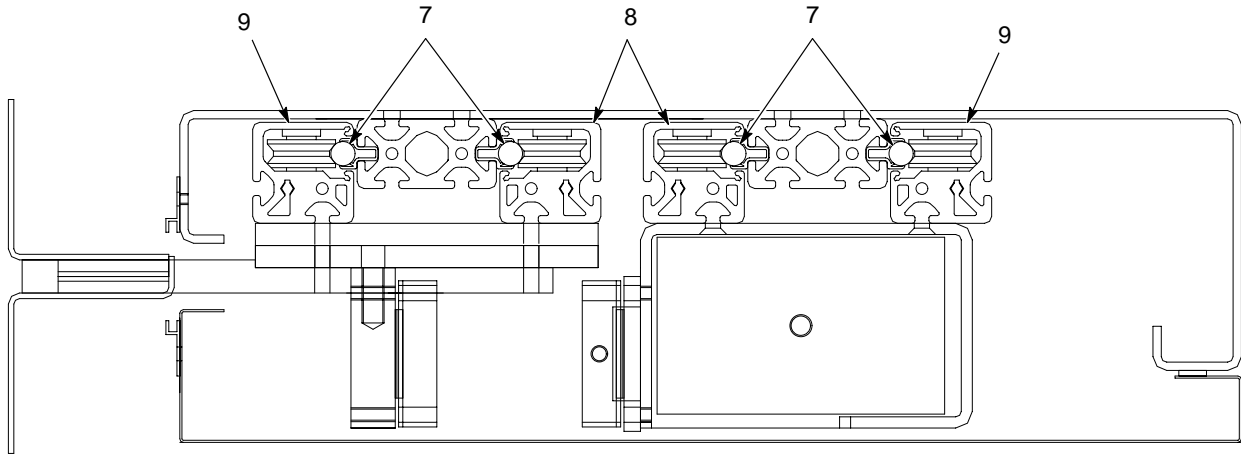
Reciprocator Parts - Rail Bearings and Guide Rails (Top View, 2 of 2)
